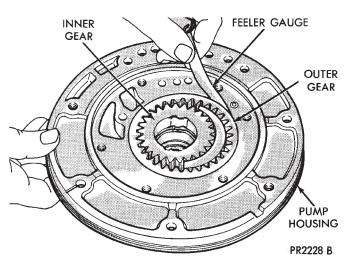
Measuring Pump Clearance (Gear to Pocket)
